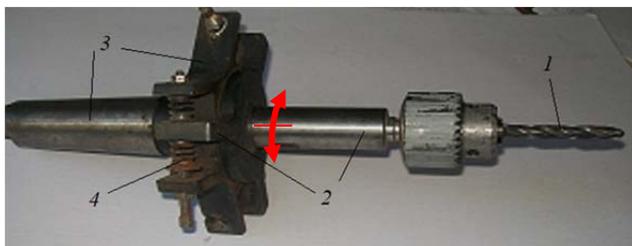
Fixture with movably mounted drill (1 – drill, 2 – shaft, 3 – fixture, 4 – springs)
